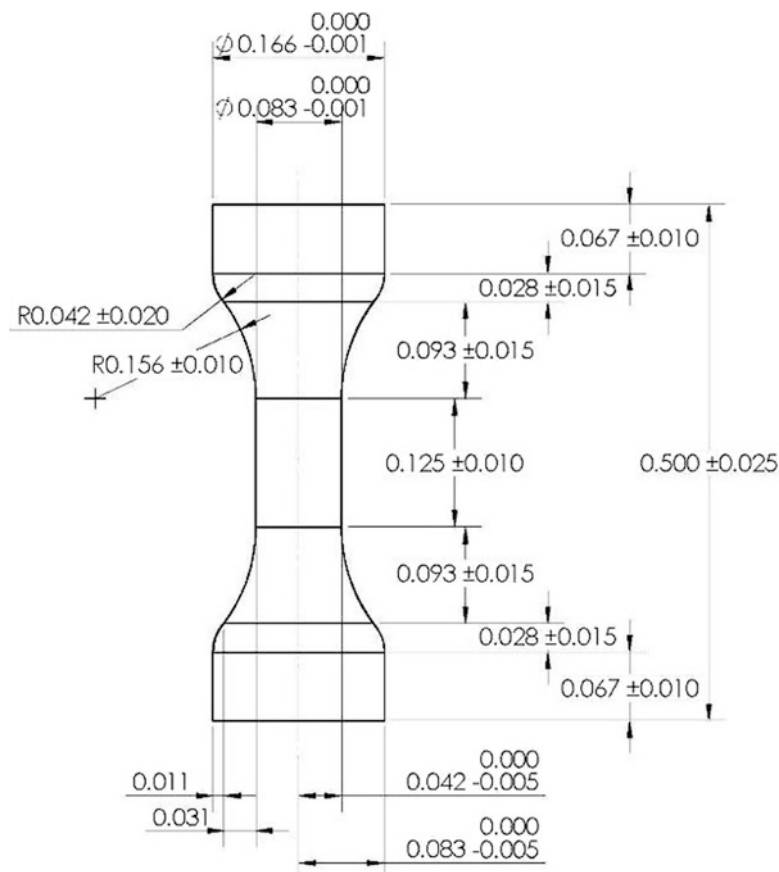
Fabrication drawing for alumina dumbbell compression specimens. Dimensions in inches
